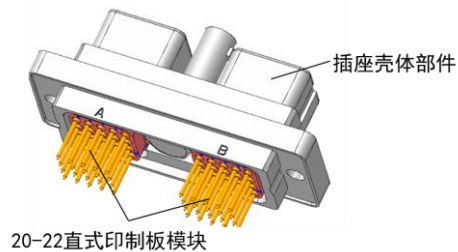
CW8942 two-cavity direct printed board short flange socket connector structure diagram
